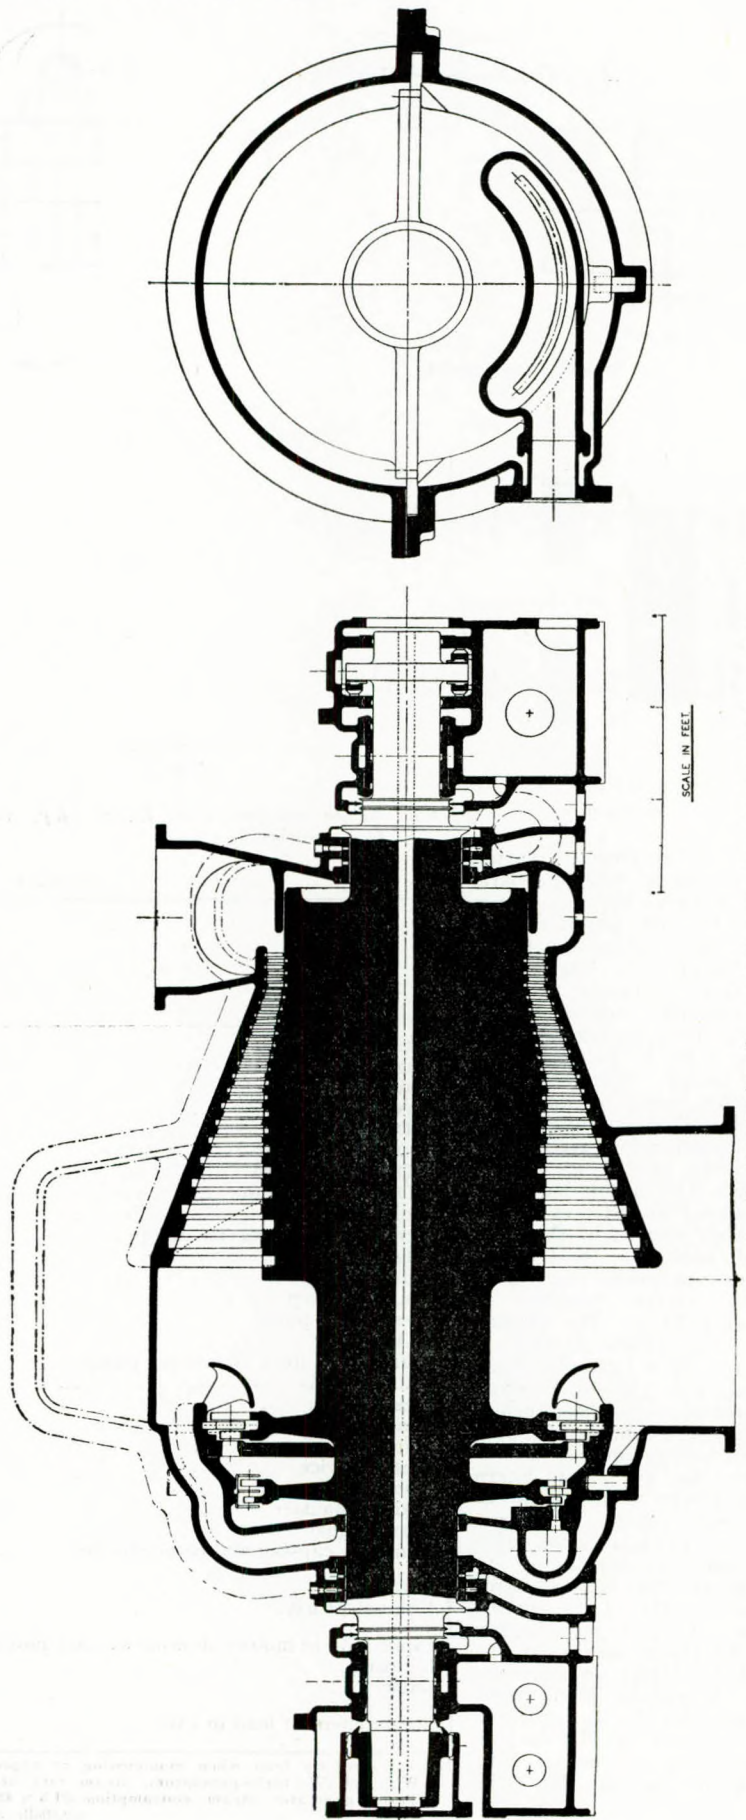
Sectional elevation of L.P. ahead and astern turbine, Scheme 2.
